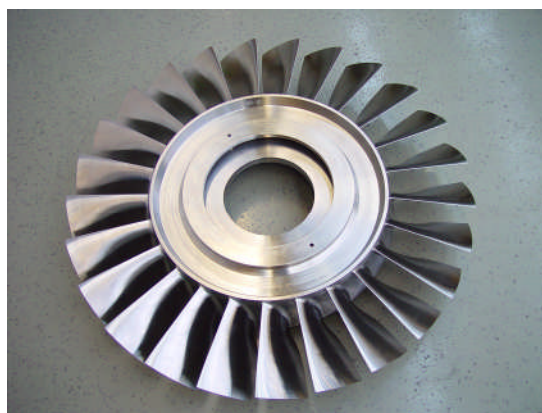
Test blisk consisting of welded-on airfoils in Ti 6242 and a hub in Ti 6246
